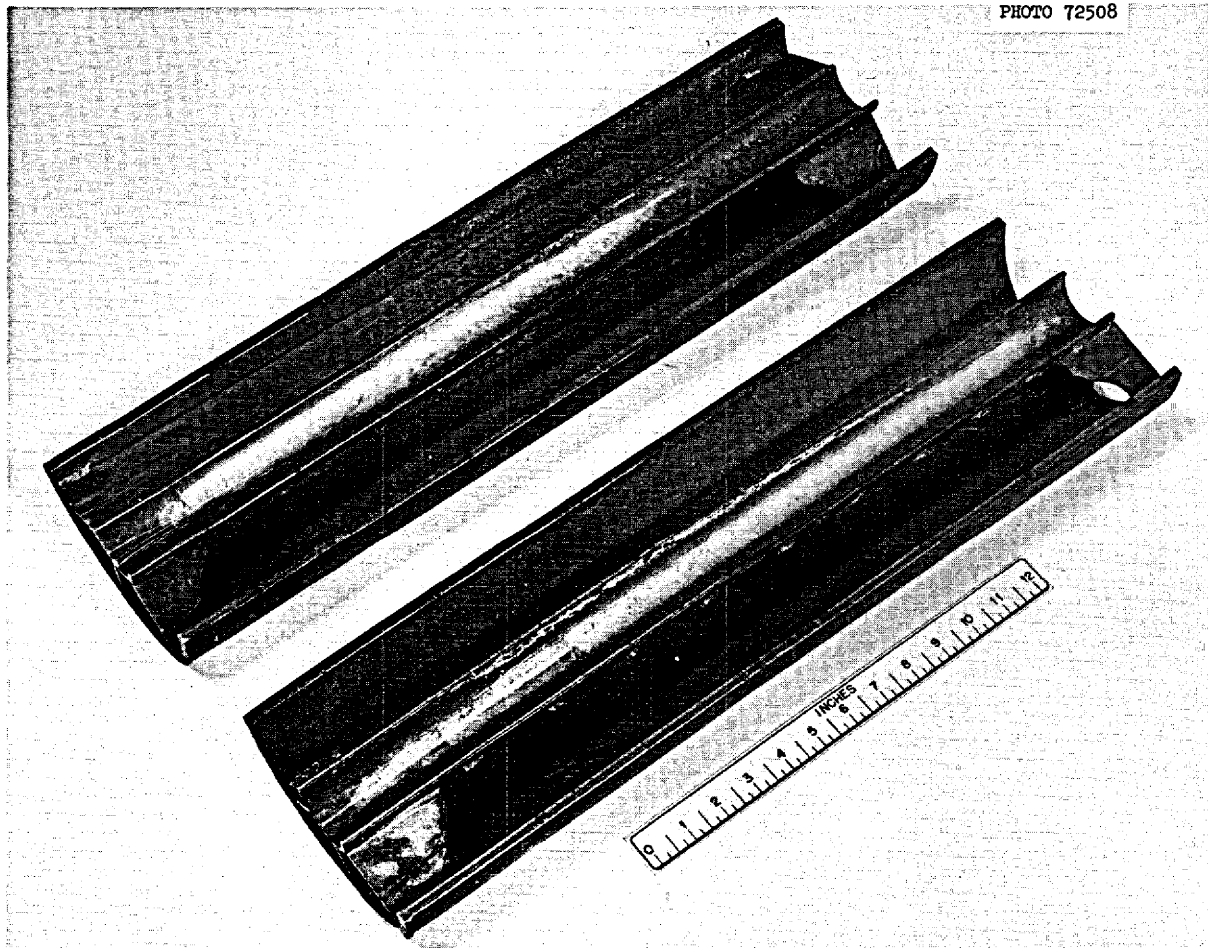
Failure of Weld Attachment of Parts in Flow Straightener. Locations are shown from which parts were detached.
